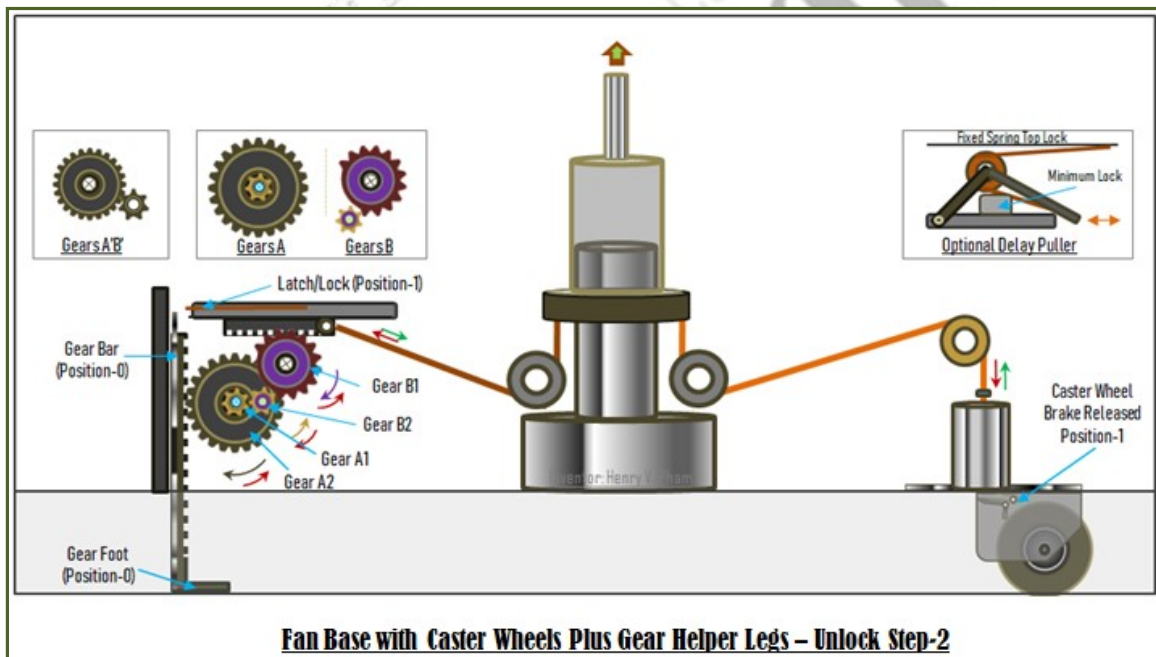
360° Stand G-Rotator Fan – Caster Wheels & Gear Helper Legs Lock/Unlock Step-2
